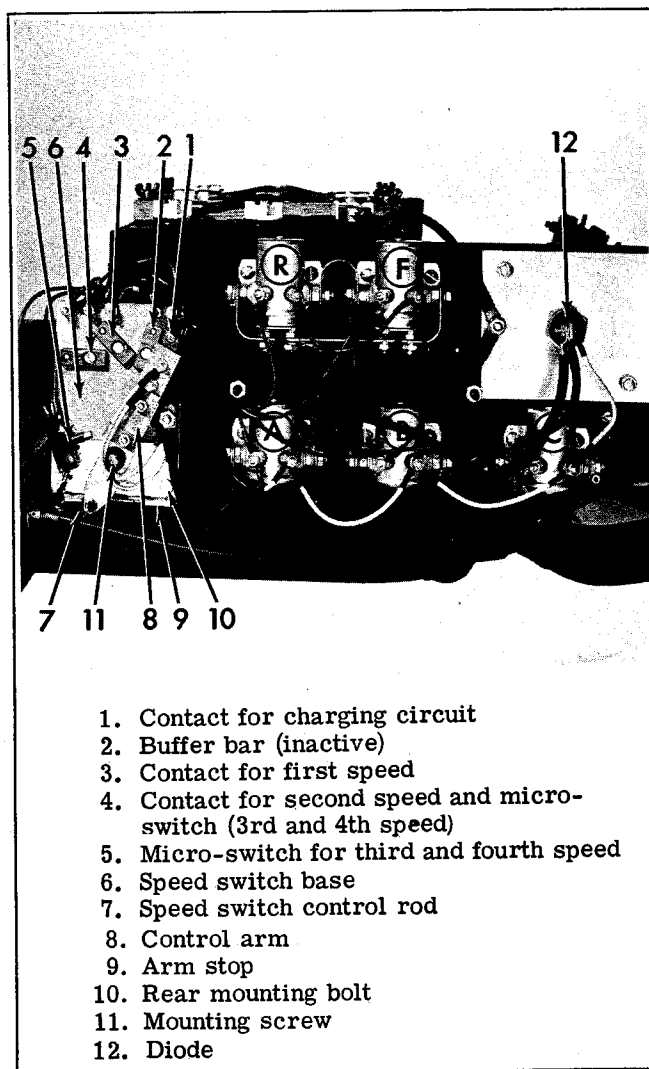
Speed Switch Solenoid Panel and Wiring (1967-71 DE Model)
